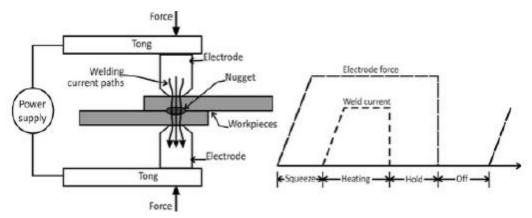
Schematic diagram of resistance spot welding system
